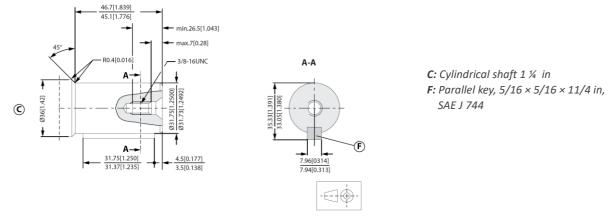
OMH shaft version: Cylindrical shaft 1 % in; Parallel key, 5/16 \times 5/16 \times 11/4 in, SAE J 744
